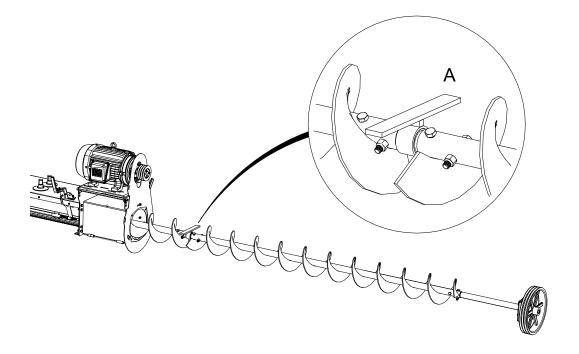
Hanger Bearing Bushing Assembly Properly Seated in its Support Bracket
